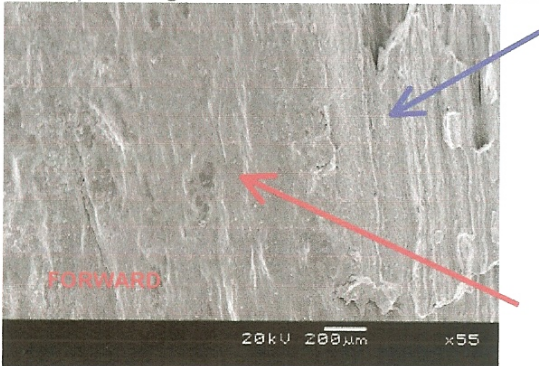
Lab opened fracture showing existing and 'new' surfaces (x55, SEM)
